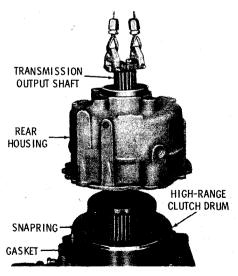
Removing rear housing (TRT 2221-3, 2421-3 with underdrive)
